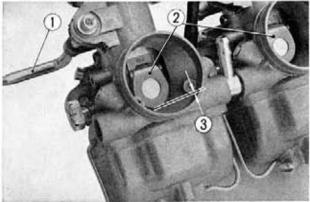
① Choke lever ② Choke valve ③ Clearance between choke valve and body
